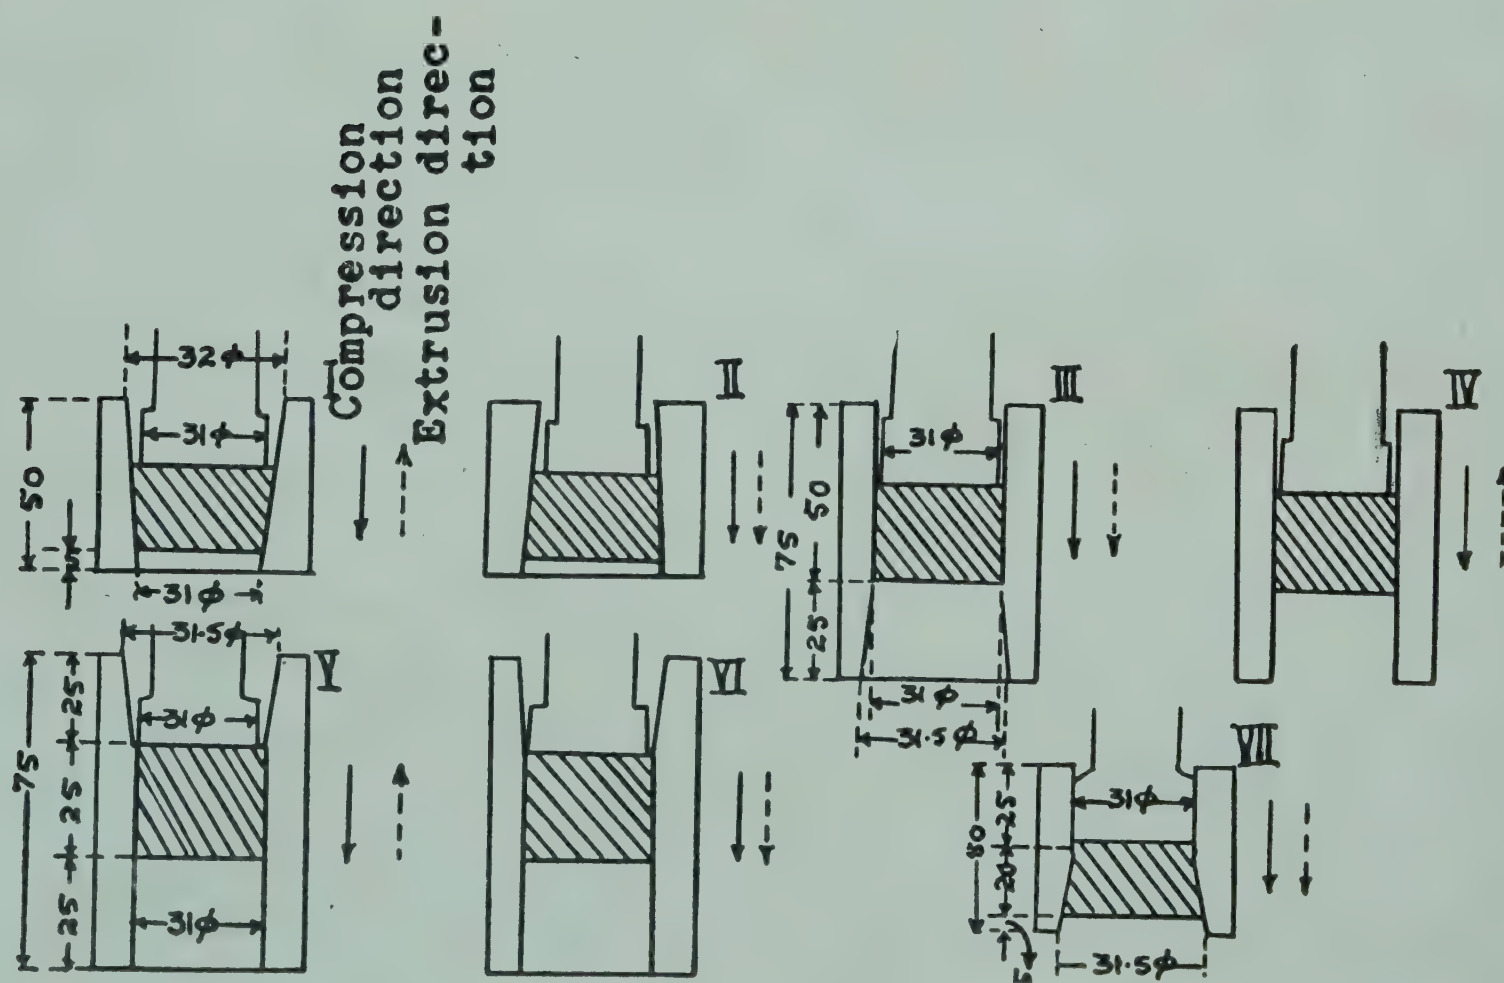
TYPES OF MOULDING DIE AND EXTRUSION METHODS
